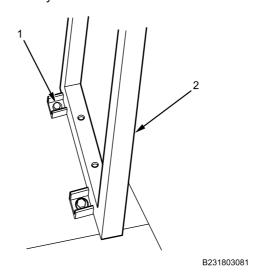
Gunner Platform Stand Floor Mounting Bolts.
